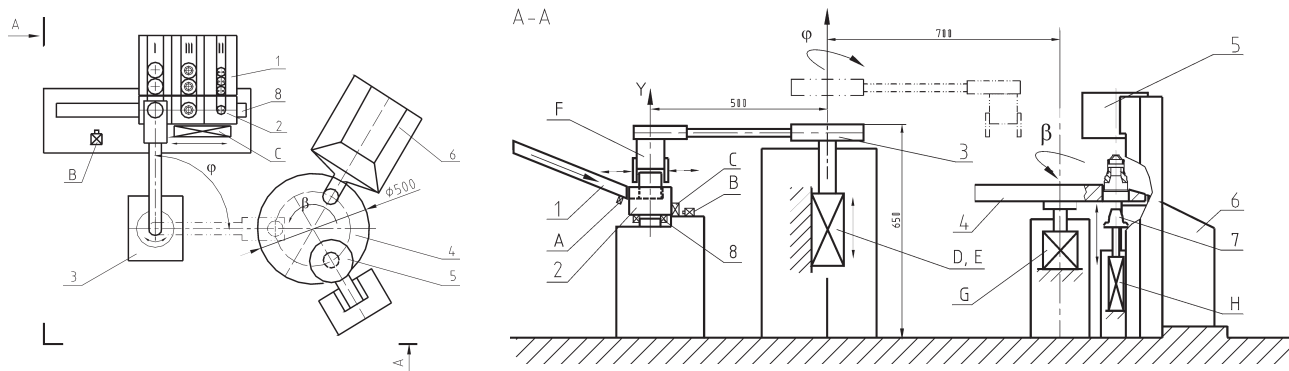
Schematic diagram of an automated station for the incandescent lamp unit assembly: 1 – container with lamp unit elements, 2 – cassette holding one set of lamp unit elements, 3 – manipulator, 4 – assembly table, 5 – inductor head, 6 – finished product store, 7 – feeding pin
